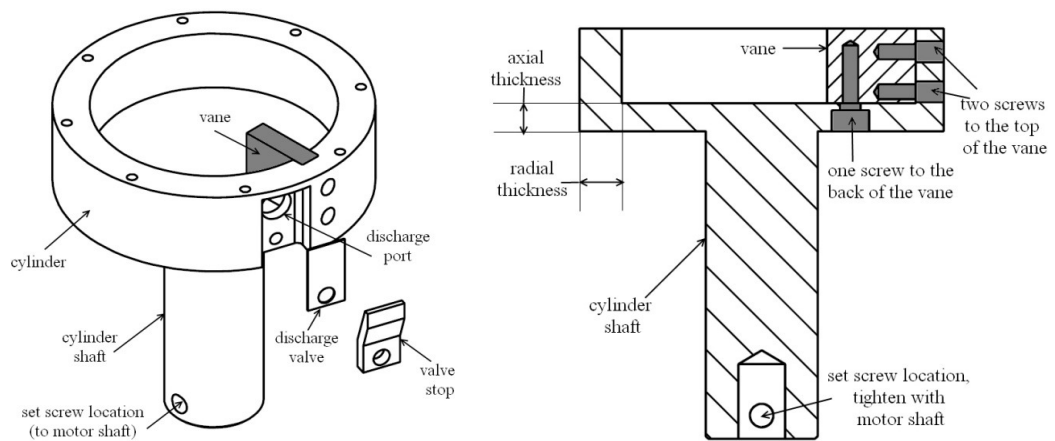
Assembly of cylinder, vane, discharge valve and valve plate
